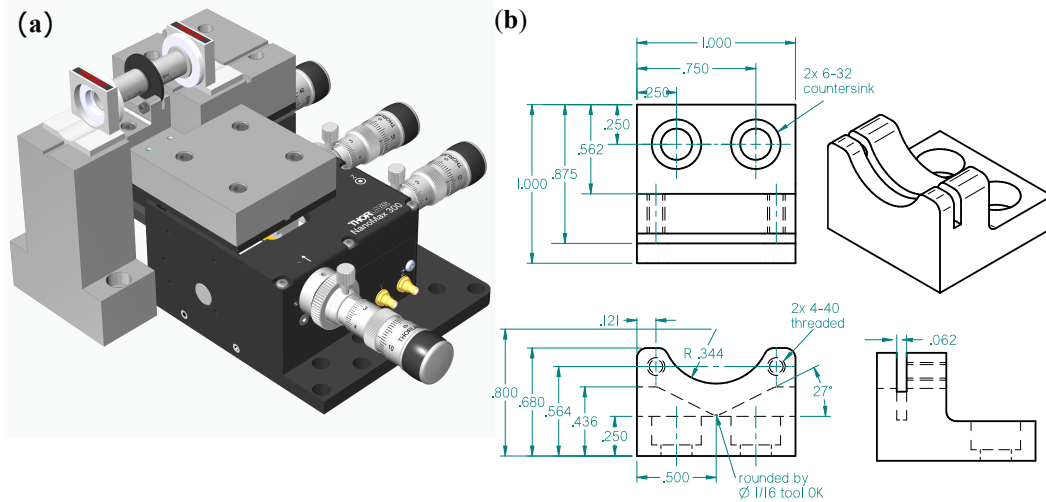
(a) Rendering of the optical trap set up for pinhole alignment. (b) Technical drawing of the removable pinhole clamp, including details of the V-shaped groove.
